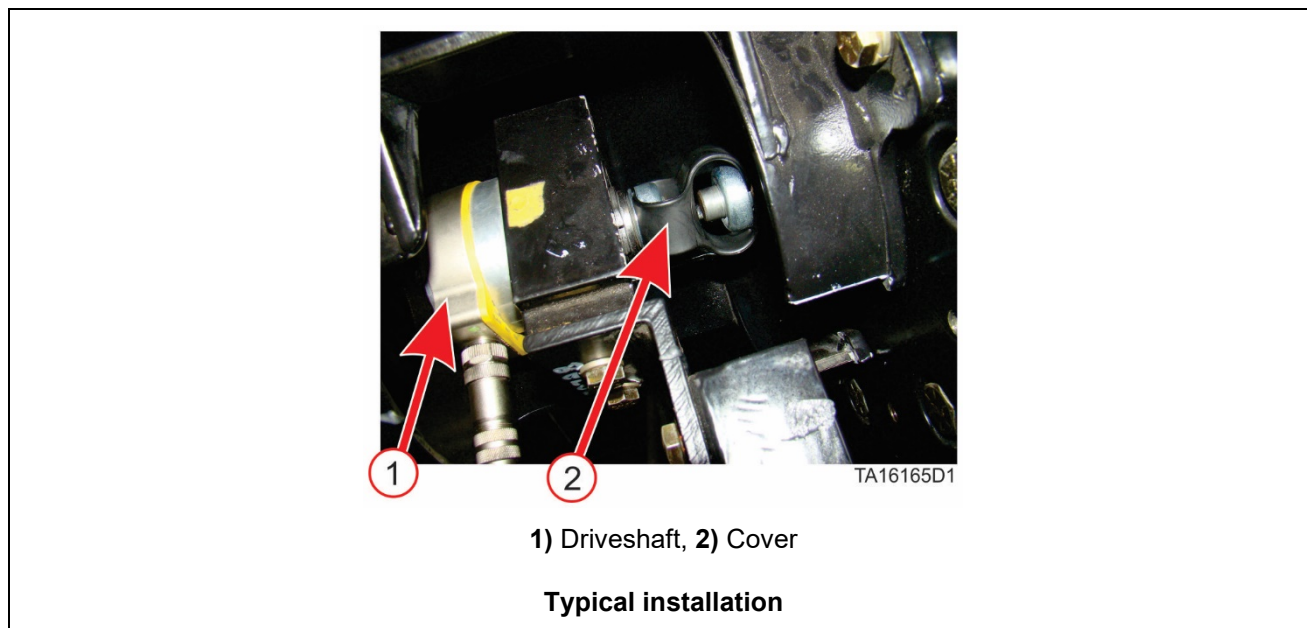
Automatic bucket leveling circuit encoder (Gen3 machines)
